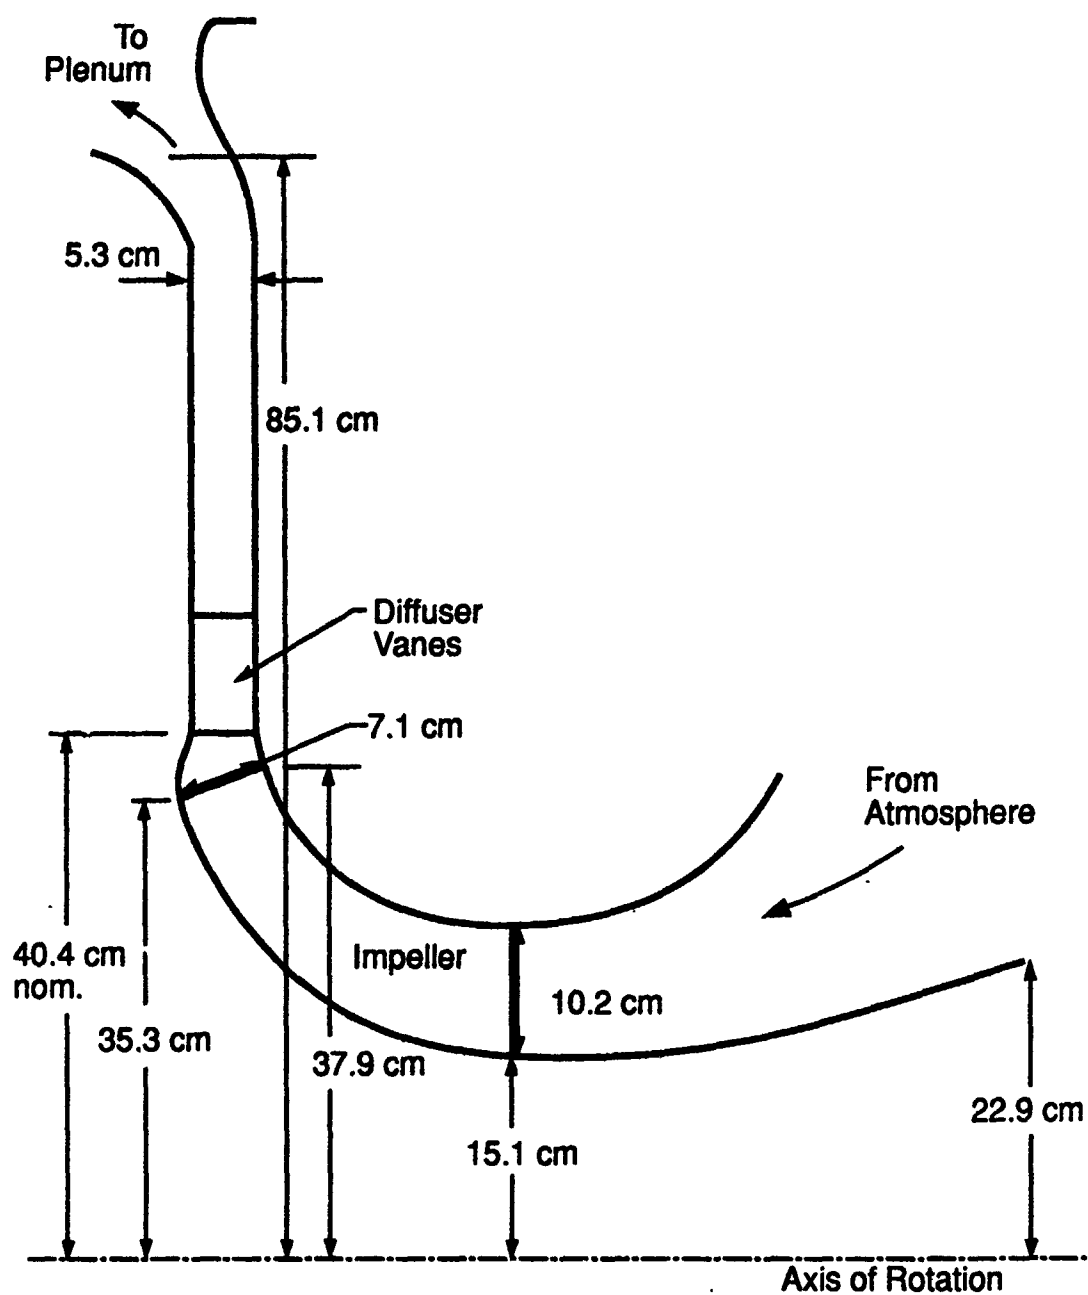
Inlet, Impeller, and Diffuser Flow Channel
